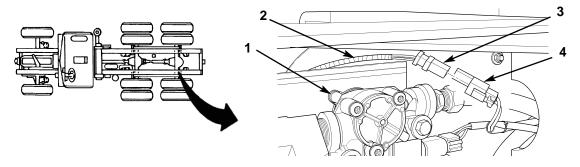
Disconnecting Wheel Sensor Cable at Rear Modulator.
